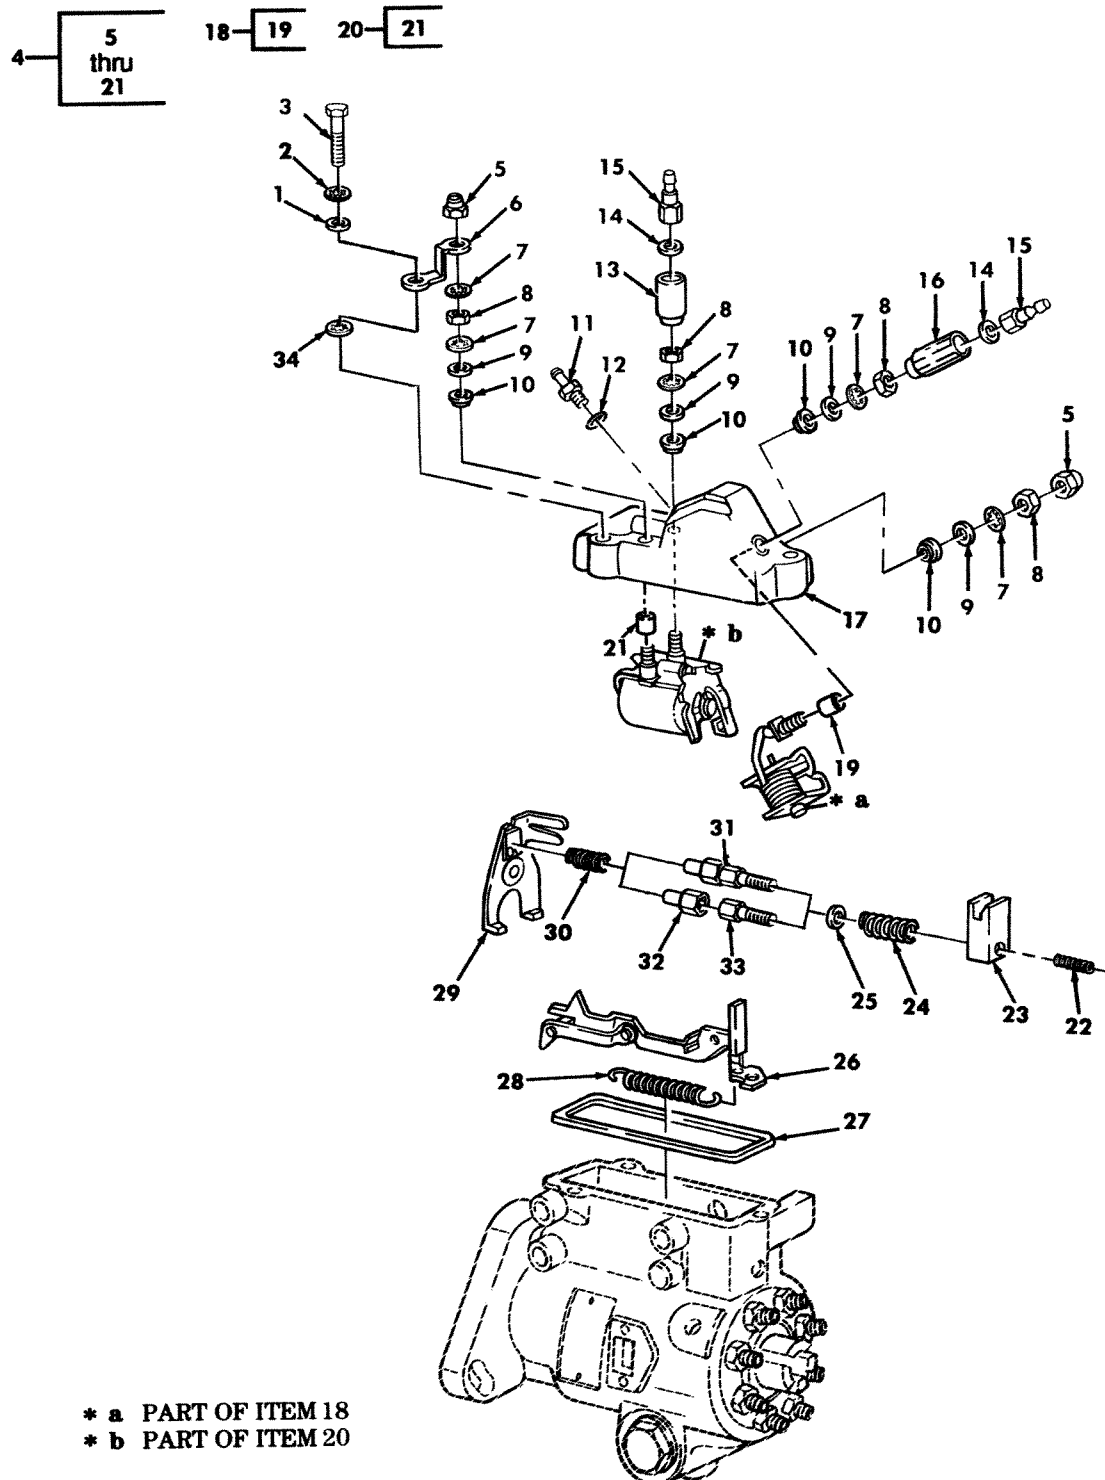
Fuel Injection Pump Cover Assembly, Governor Linkage, and Related Parts.
